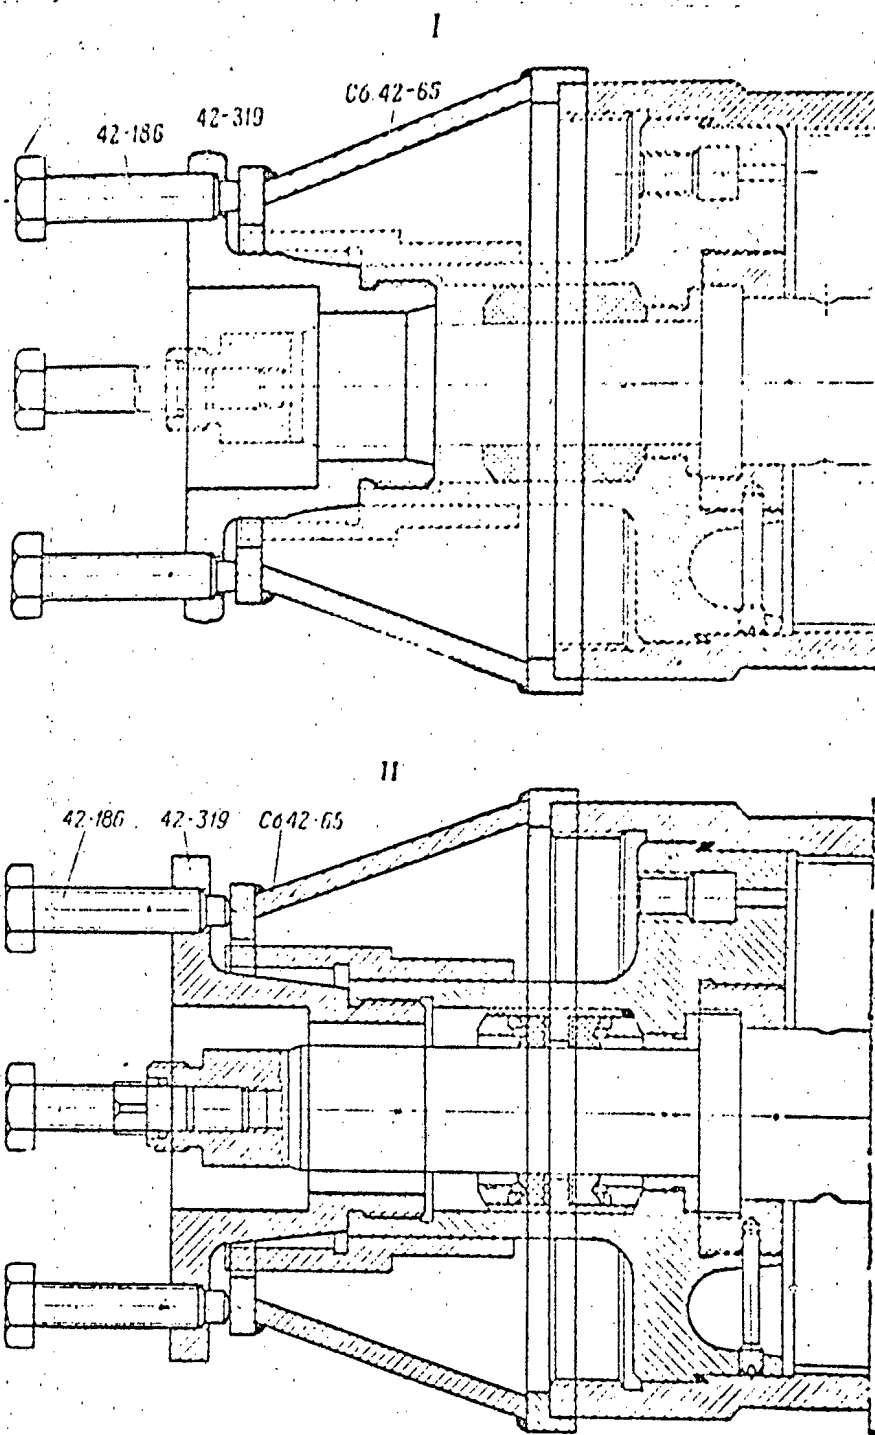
Tool (Sb 42-45) For Disassembling Recoil Brake
